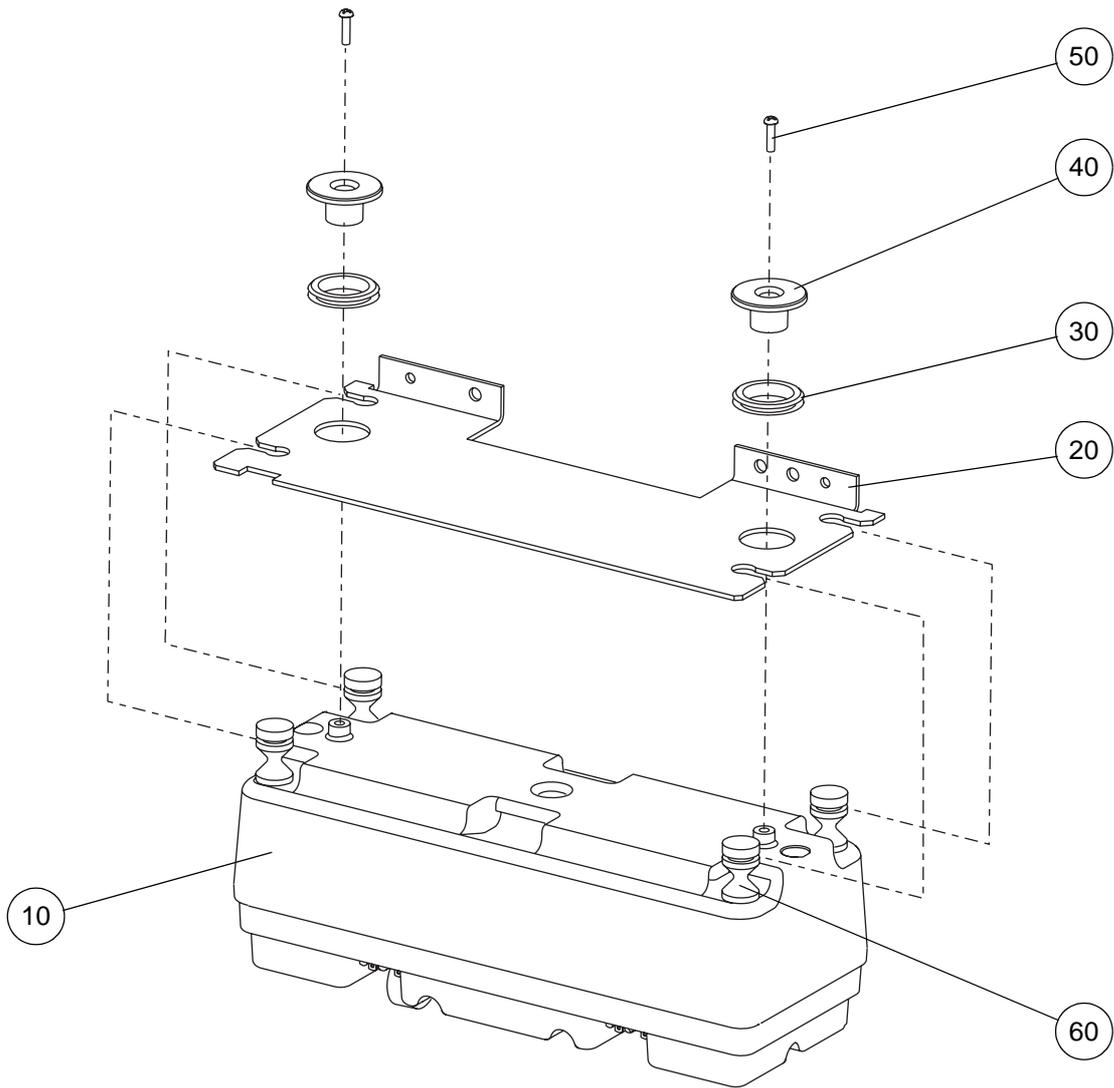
Removing the Compressor Assembly from the Mounting Bracket
